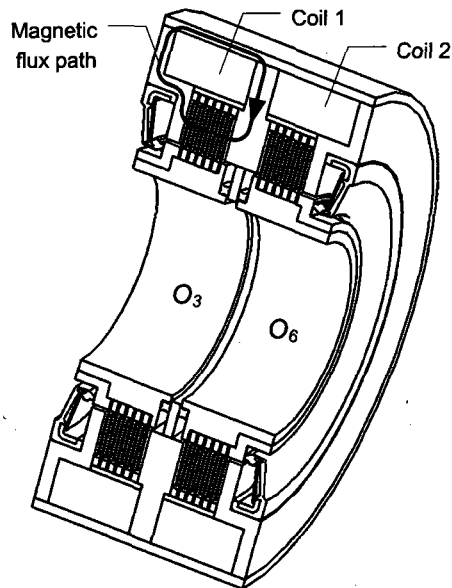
Cross-sectional perspective view of the MR brakes module
